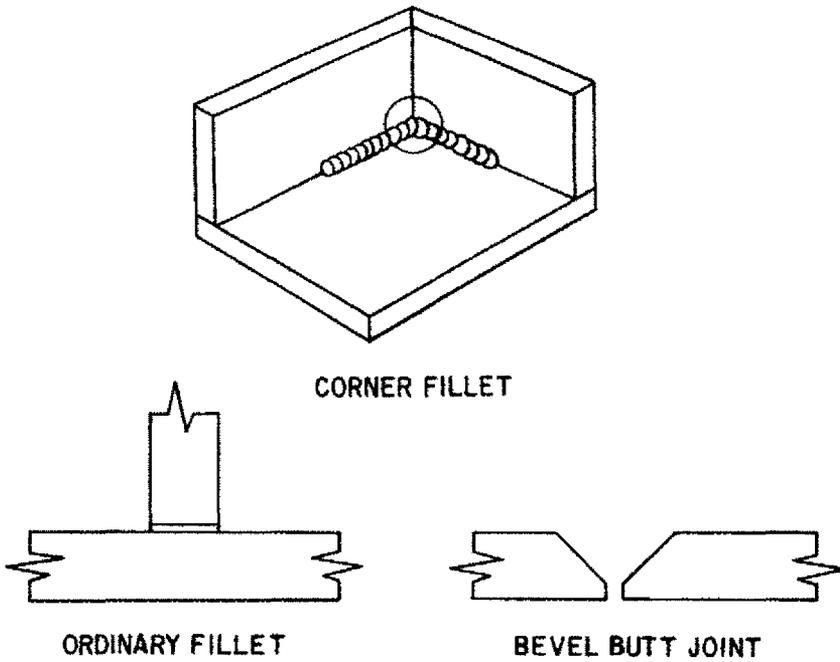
The corner fillet will cause the heat to disperse from the weld more rapidly than the ordinary fillet. The ordinary fillet will disperse heat more rapidly than the butt joint.
